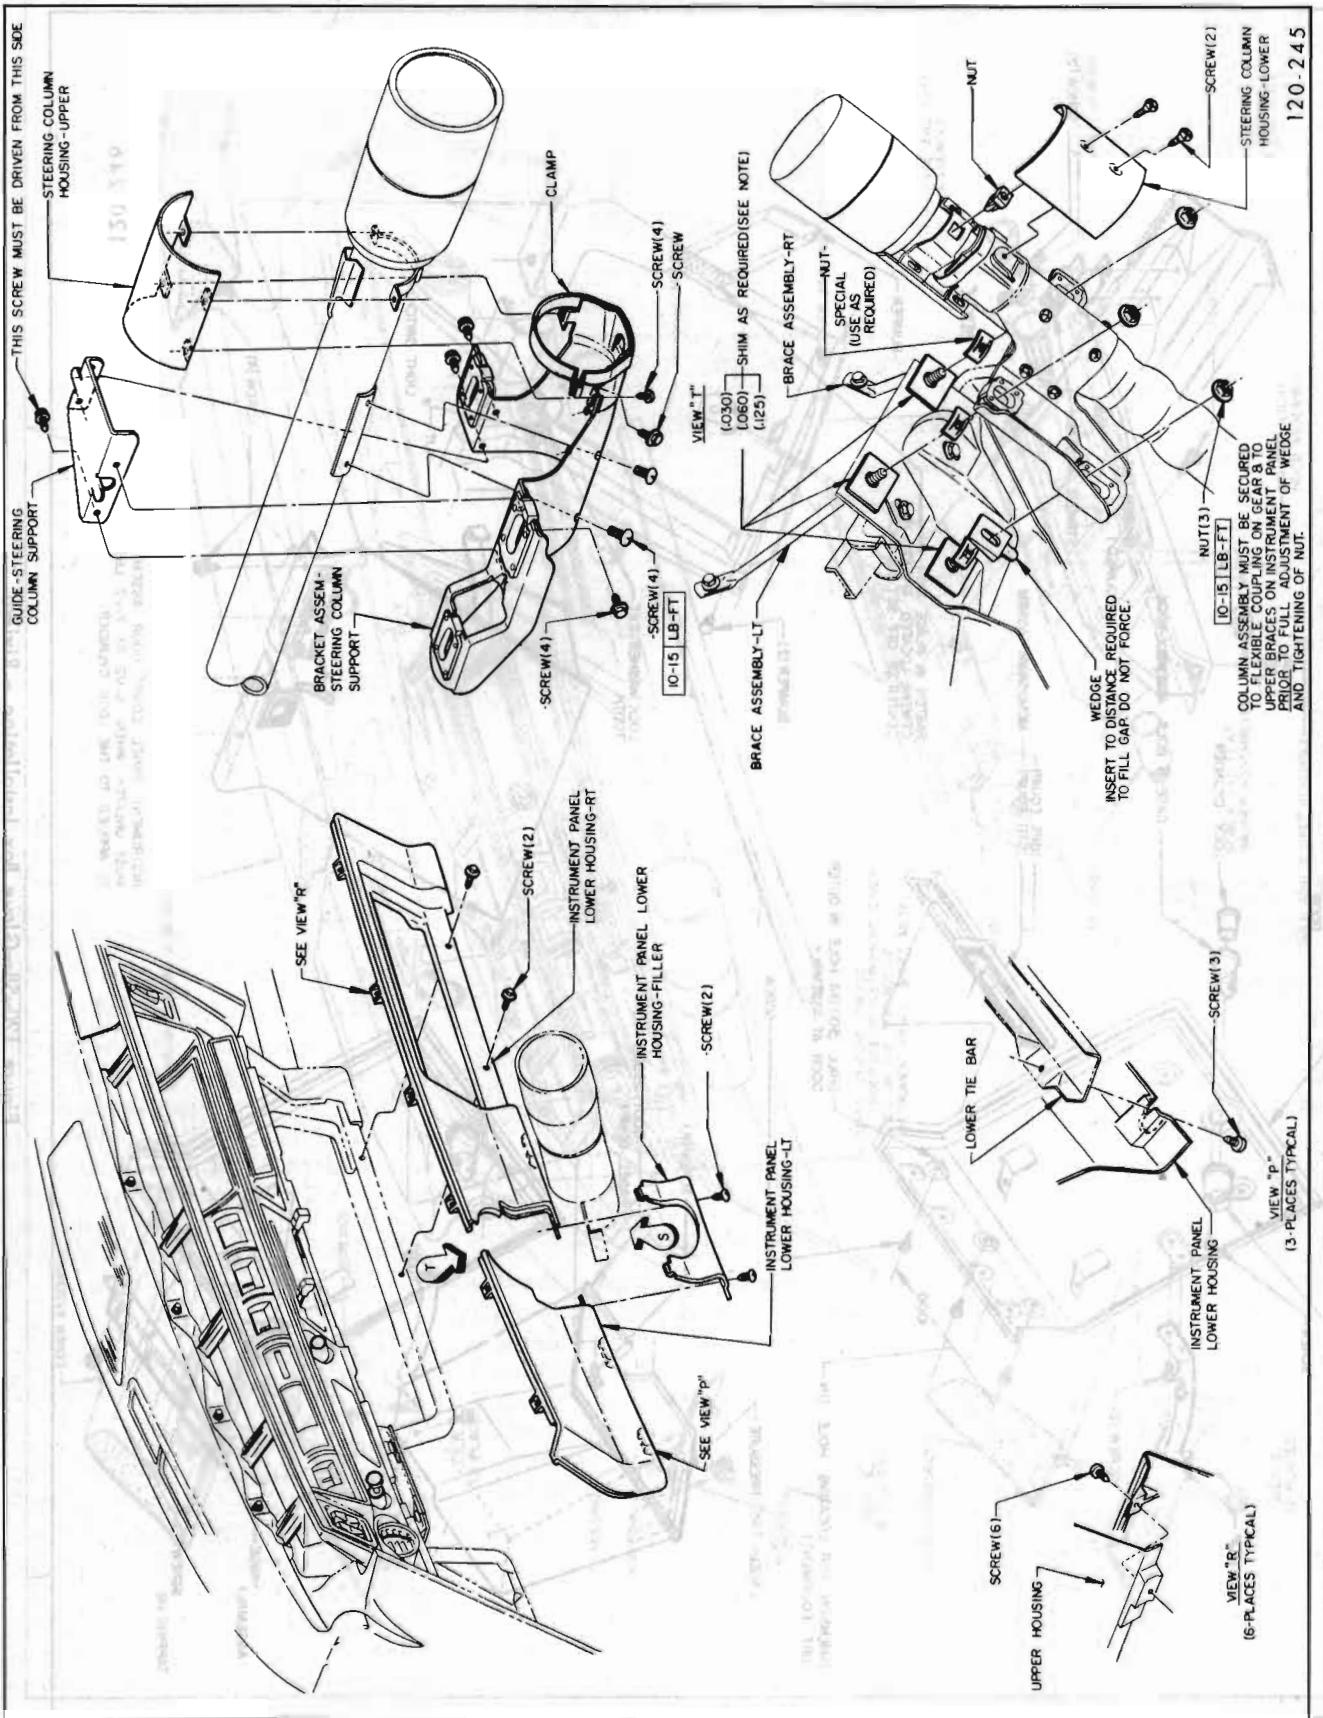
Lower Housing and Steering Column Installation - Riviera
